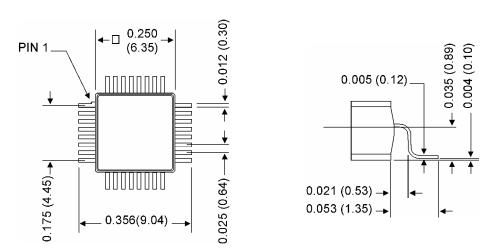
RDA012-QP package, dimensions shown in inches (mm).
